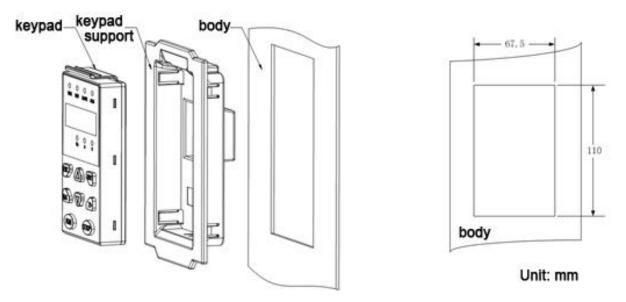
Keypad support installation diagram and control cabinet processing dimensions
